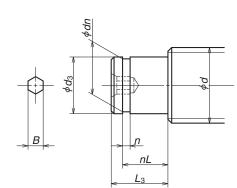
Shaft end configuration of R Series (opposite to the drive side)
